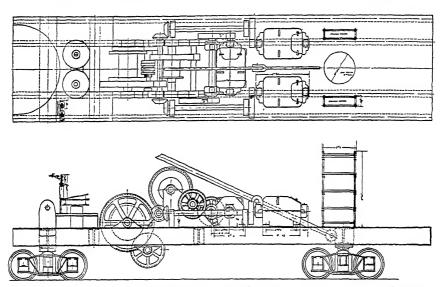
Plan View of Shovel, Showing Best Method of Locating and Gearing Motors to Hoist and Swing Machinery.
